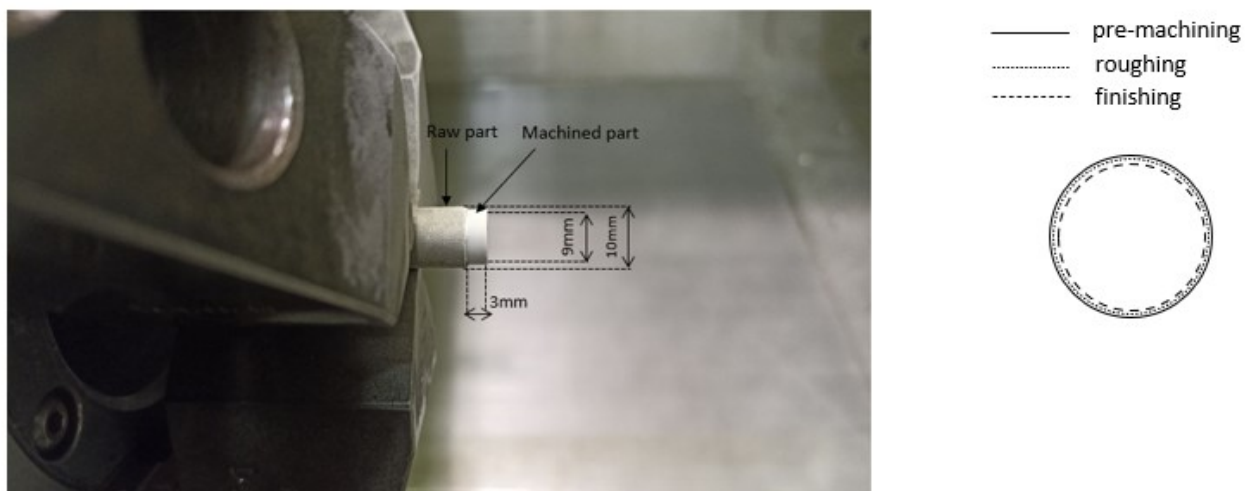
3: Sample inserted in the lathe jaws, dimensions of machined and raw part are shown (left), the three situations of pre-machining, roughing, and finishing are shown in the cylindrical sample section (right).
